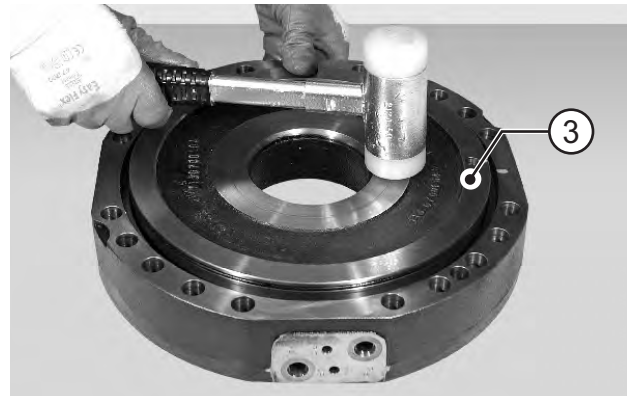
Using a plastic hammer, install the piston (3) into the cylinder (17).
